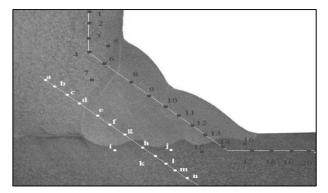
Macroscopic image of a fillet weld cross-section
